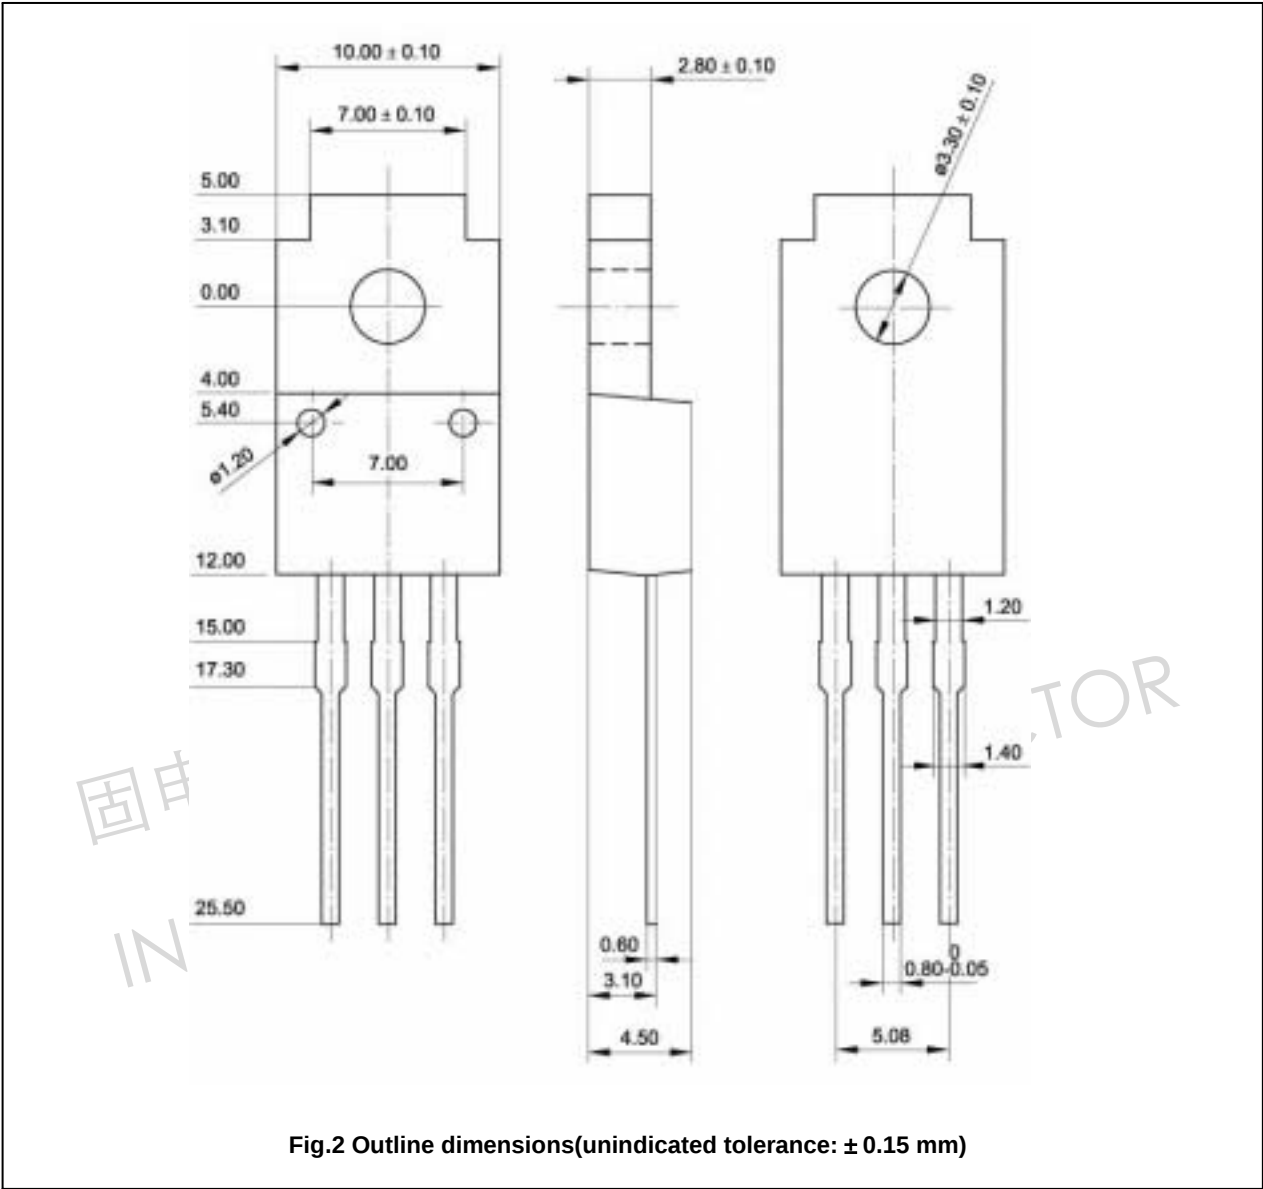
Outline dimensions(unindicated tolerance: ± 0.15 mm)
